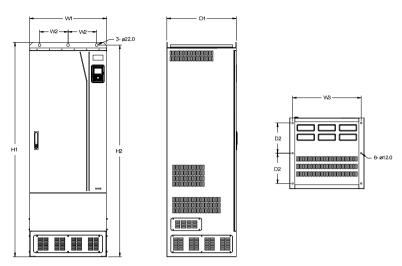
Floor installation diagram of inverters of 660 V, 400 to 630 kW
